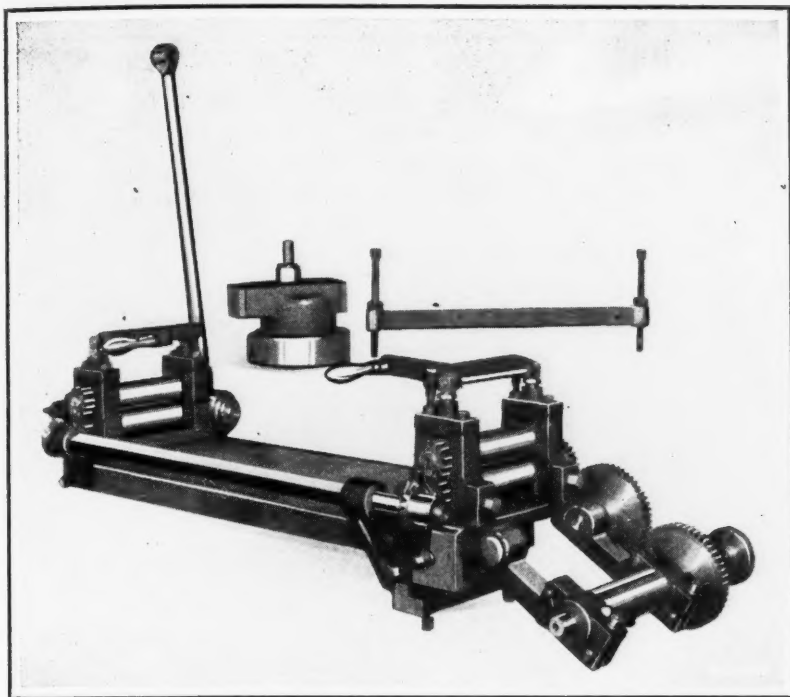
Double-roll Feed built as a Self-contained Unit on a Bolster Plate
